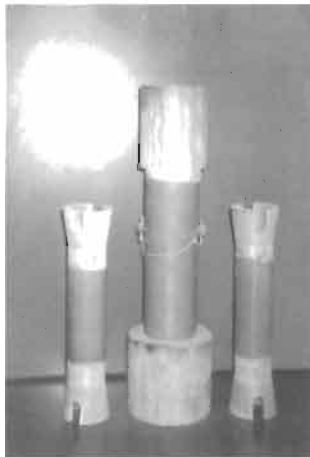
Glass fabric-epoxy test tubular specimens.
